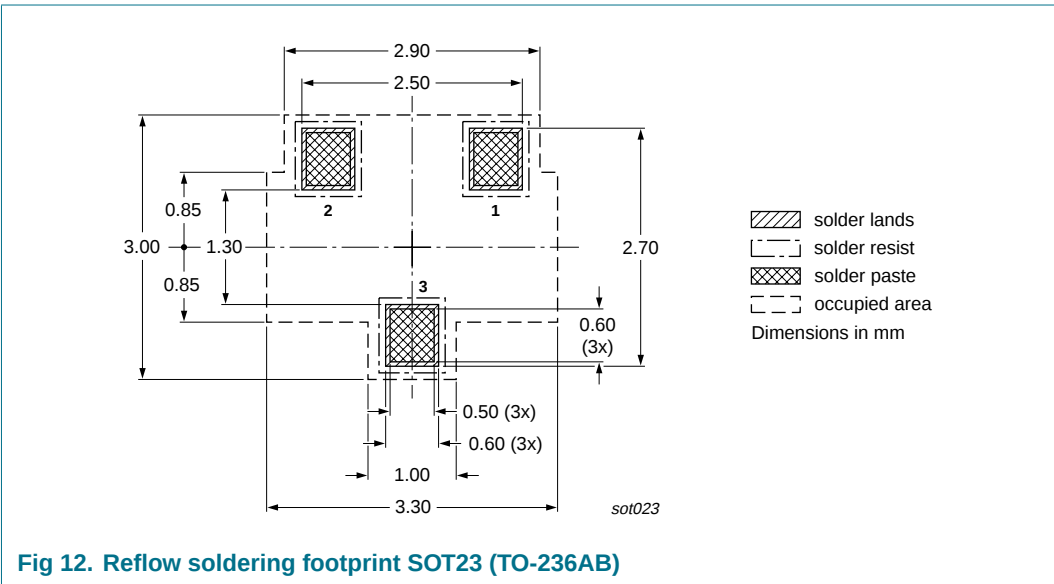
Reflow soldering footprint SOT23 (TO-236AB)
